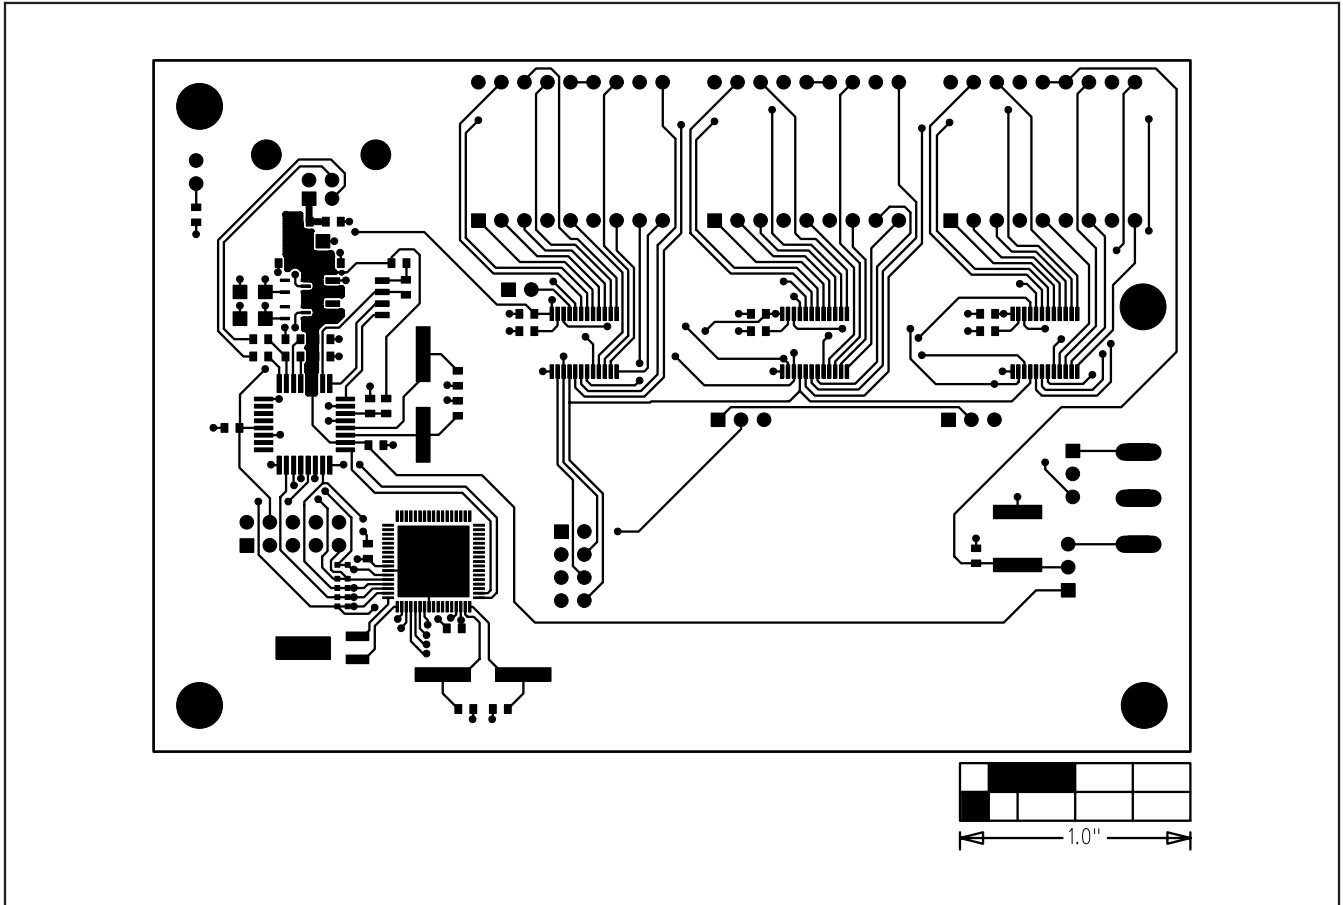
MAX6969 EV Kit PCB Layout—Component Side
